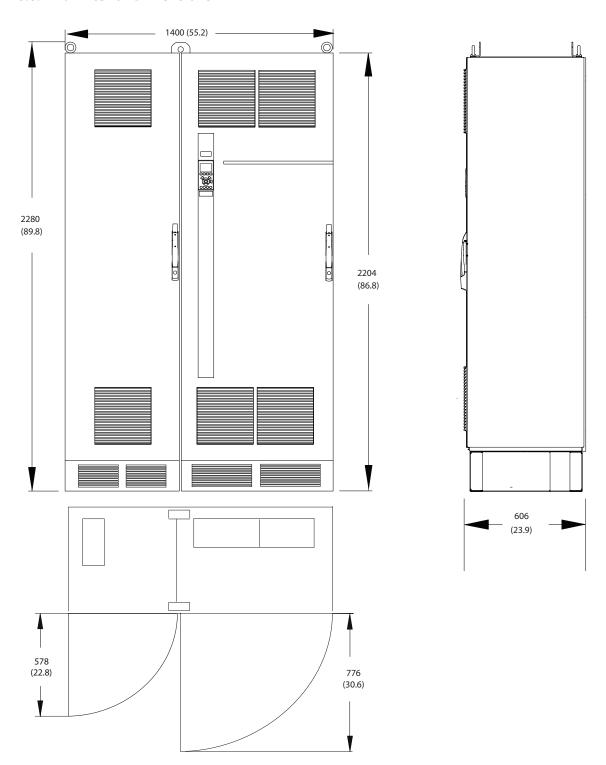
Front, Side, and Door Clearance Dimensions for F9
